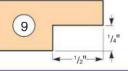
Rout the 1/4" x 1/2"-wide rabbets on the ends of the drawer sides (pieces 9). The total finished width of the drawers needs to be 21".
